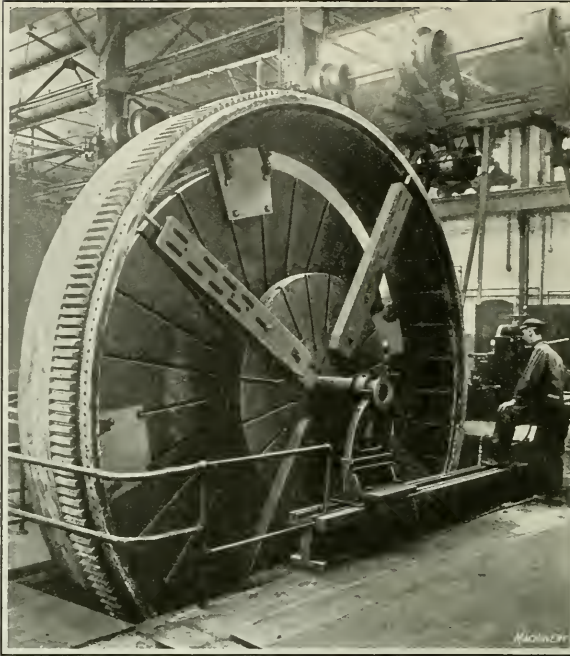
Gear Planer provided with a Pit for swinging Large Gears
